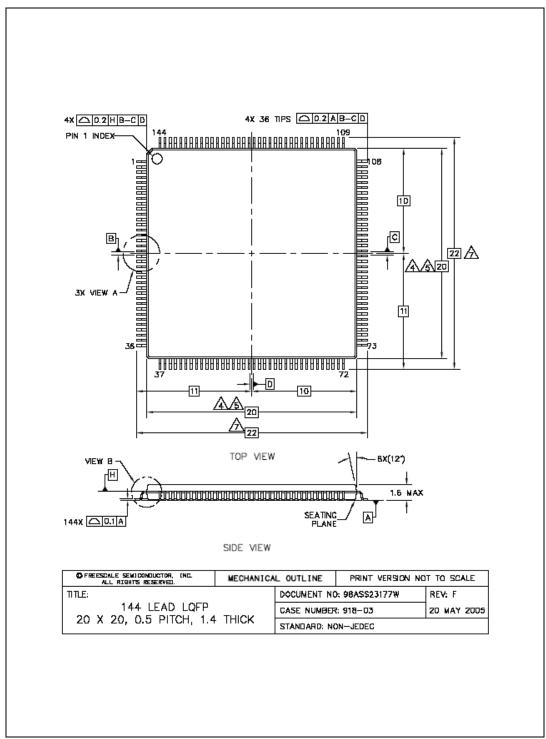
144 LQFP package mechanical drawing (1 of 2)
